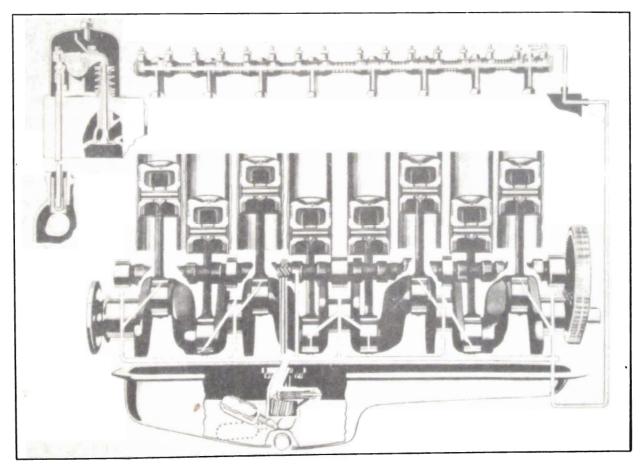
Engine Lubrication System—1948 Engines (Except Series 70 having Hydraulic Valve Lifters)
